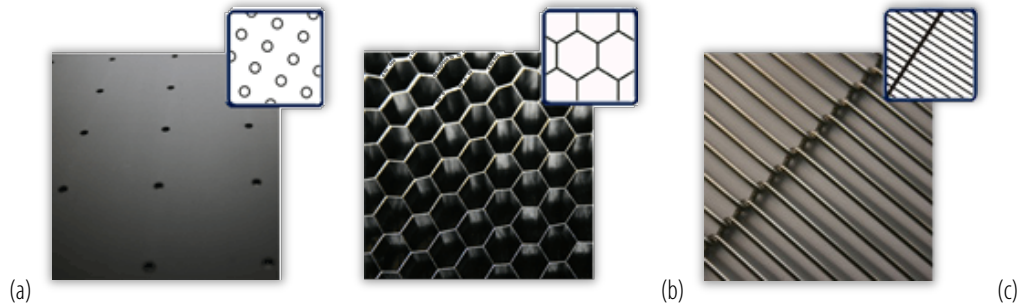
Cutting surfaces: perforated metal plate (a), honeycombs (b) and lamella (c)
